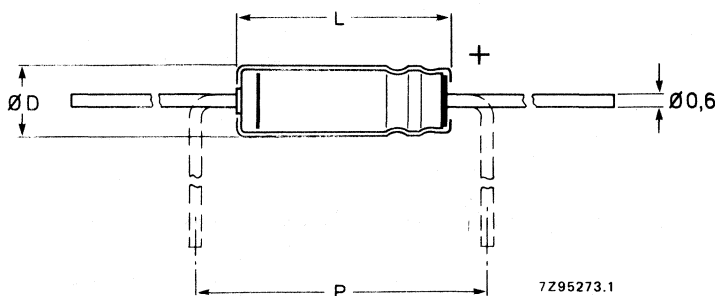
Component outline. See Table 3 for dimensions ϕD , L and P.
